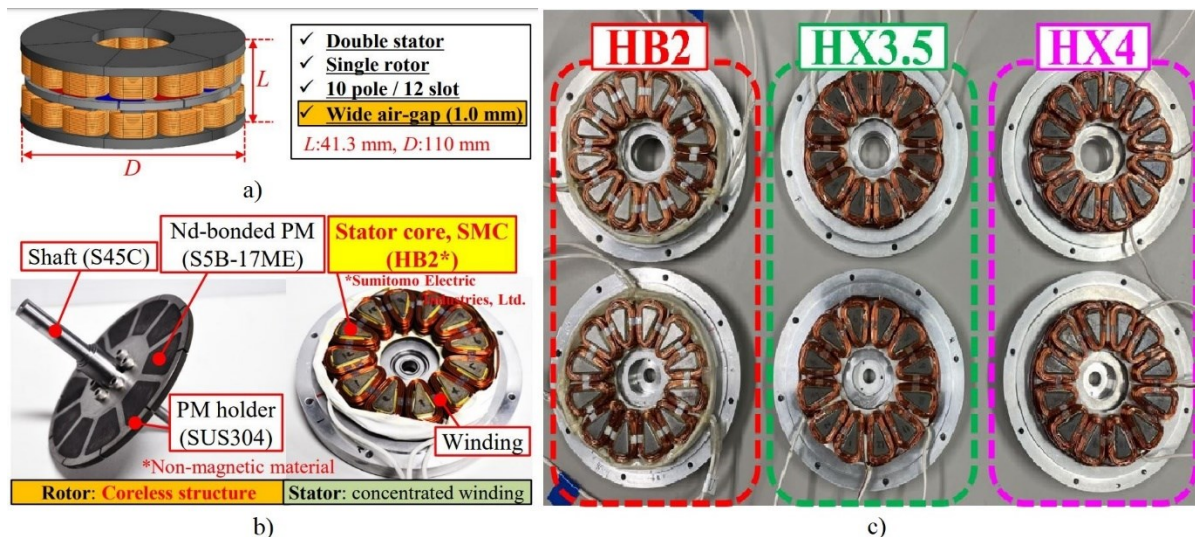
a) 3D model of the proposed machine using a coreless rotor structure. b) Appearance of the prototype using existing SMC for the stator core. c) Manufactured stators using HB2 and two newly developed SMCs (HX3.5, HX4) [57]
